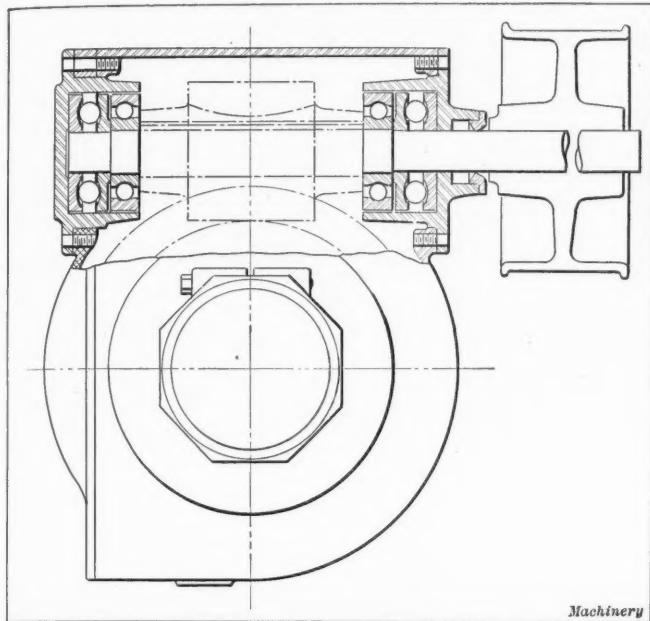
Sectional View of Worm Radial and Thrust Bearings
